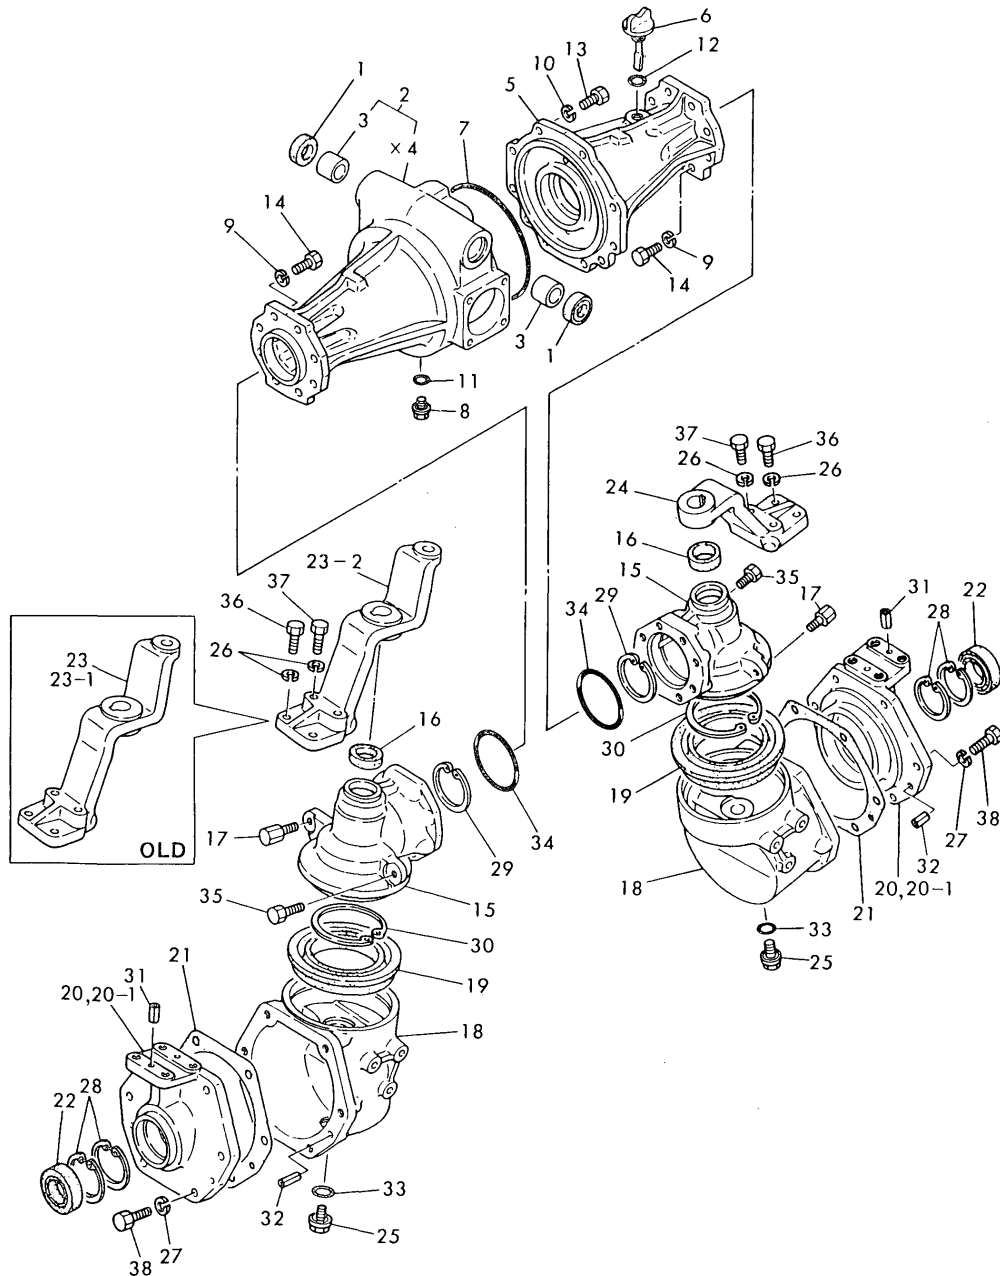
2nd SHAFT & SPINDLE OF FRONT AXLE
